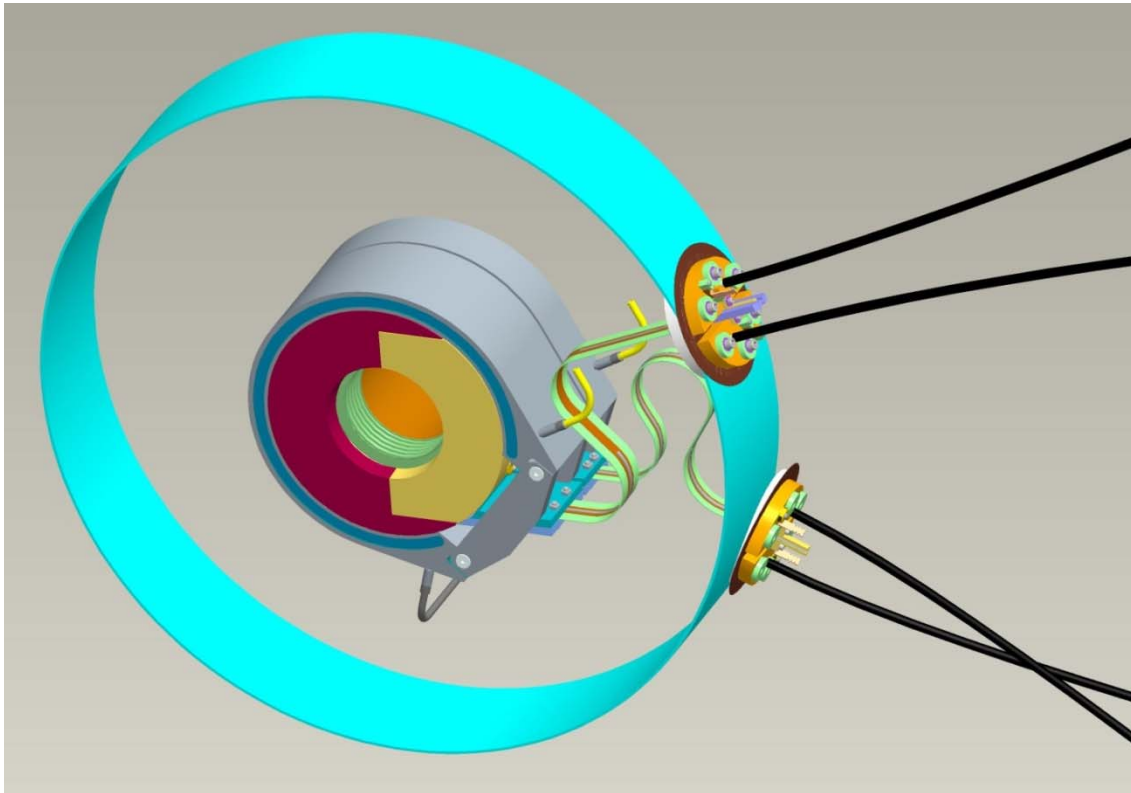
Solenoid Assembly - shown inside a portion of heat shield
